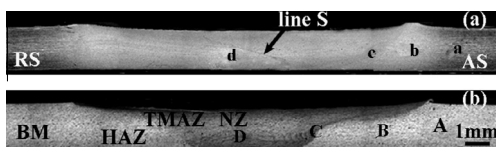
Cross-sectional macrographs of Al–Mg–Er joints of (a) as-rolled sheet and (b) as-annealed sheet.
